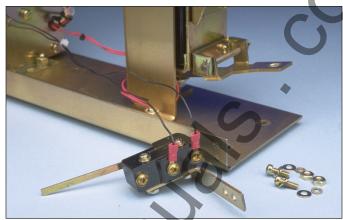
External Harness Wires connected to the Auxiliary Switch Assembly.
